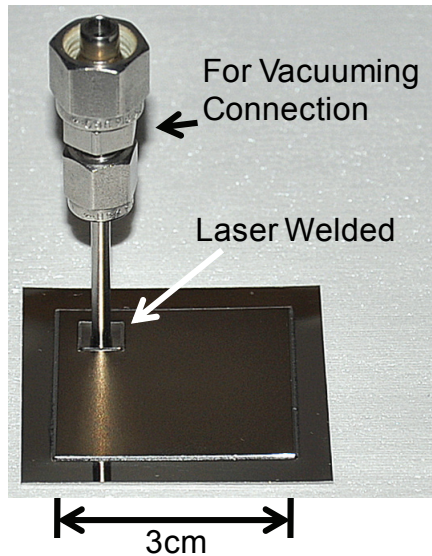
Laser welded device for hermeticity test. The device connects to the testing instrument by a 1/8 inch tube which is laser welded to the heat pipe.
